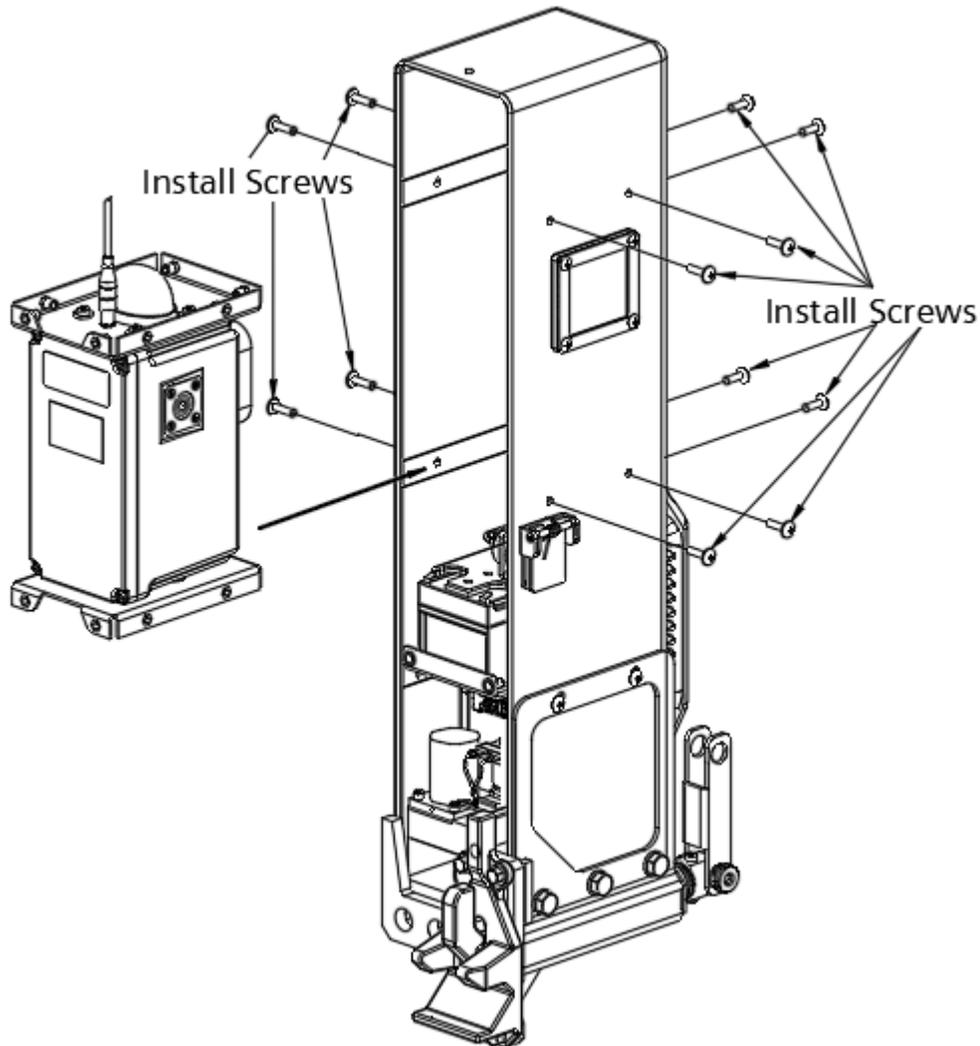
Installing the Electronic Box Assembly into the EOT Chassis
